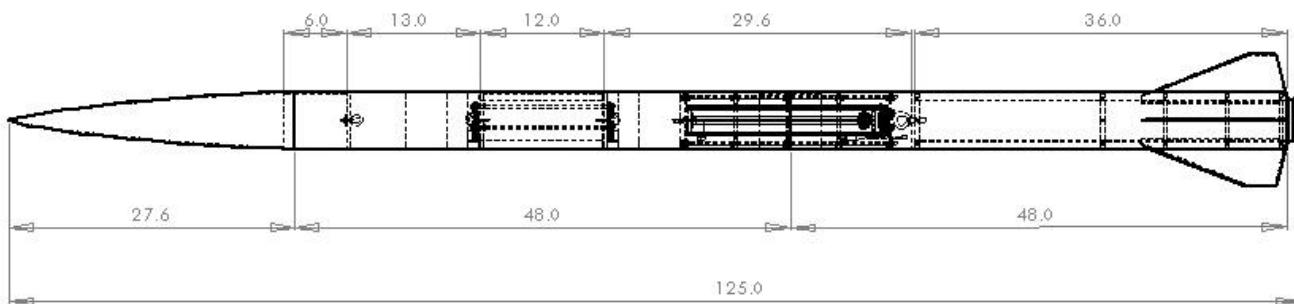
Dimensional Drawing of entire assembly. Dimensions are in inches.
